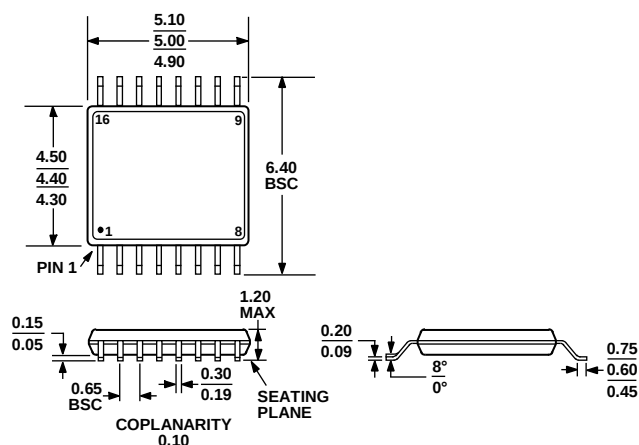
16-Lead Thin Shrink Small Outline Package [TSSOP]
